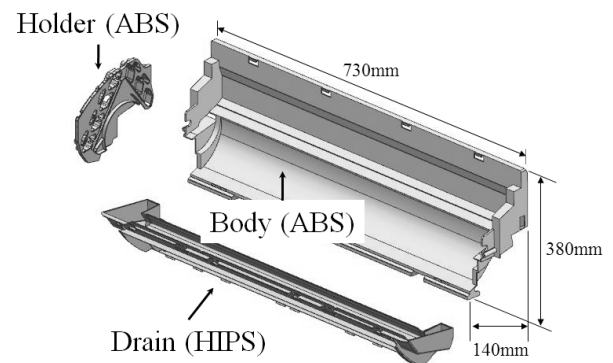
Expanded view of the assembly of Air-conditioner indoor unit
